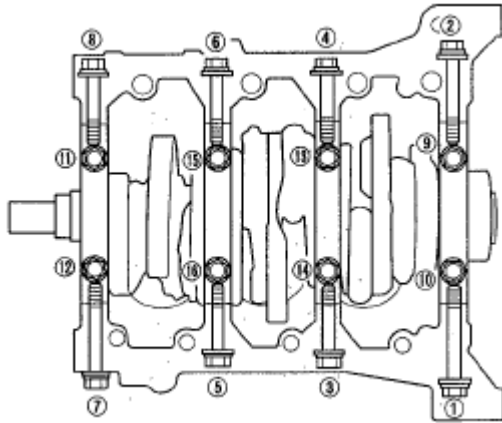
Identifying Bearing Cap Bolts Loosening Sequence
